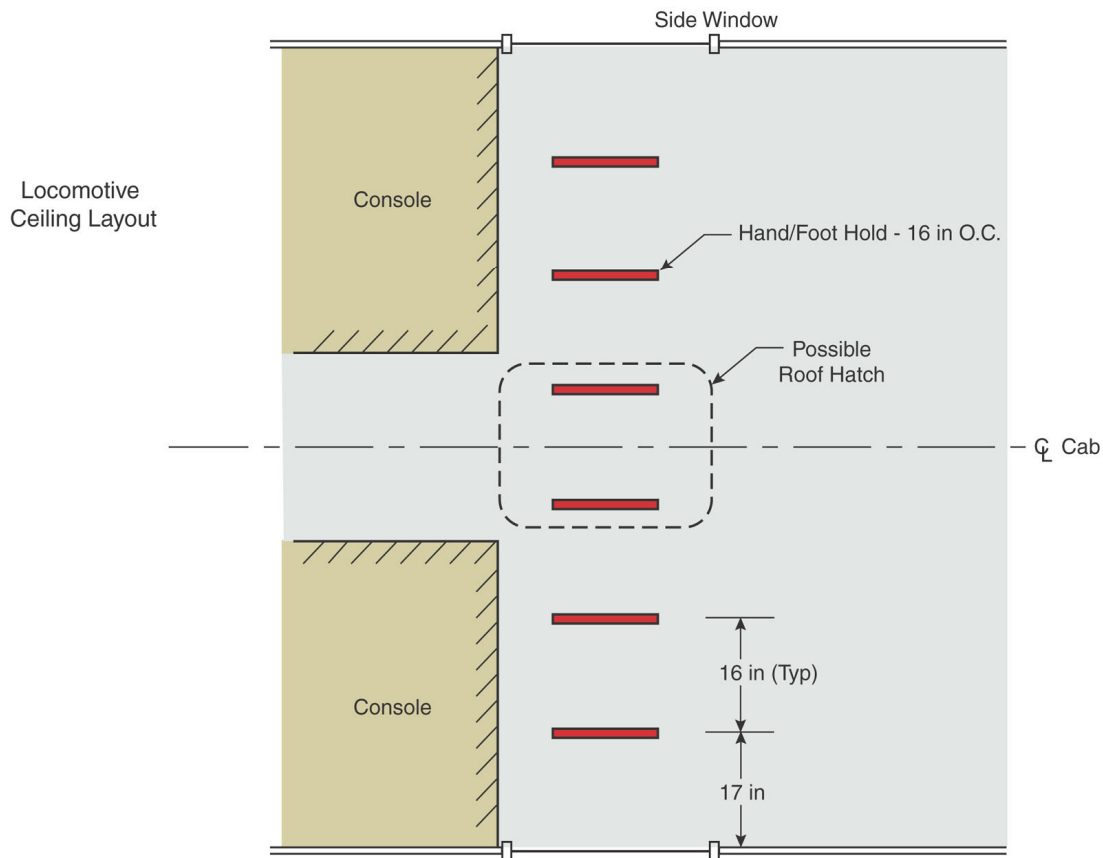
Cab Ceiling View of Hand/Foothold Layout
